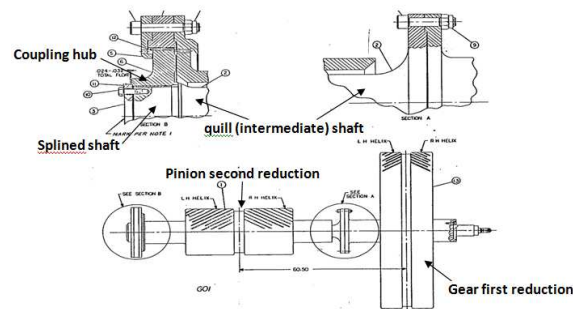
General drawing of pinion second reduction and gear first reduction assembly
